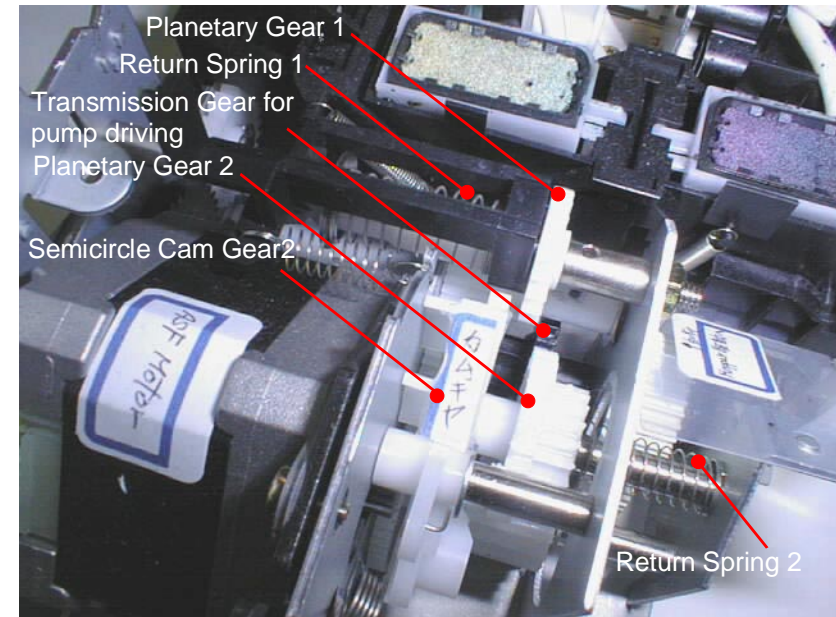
Gear Train Condition at transmitting power to the Pump
